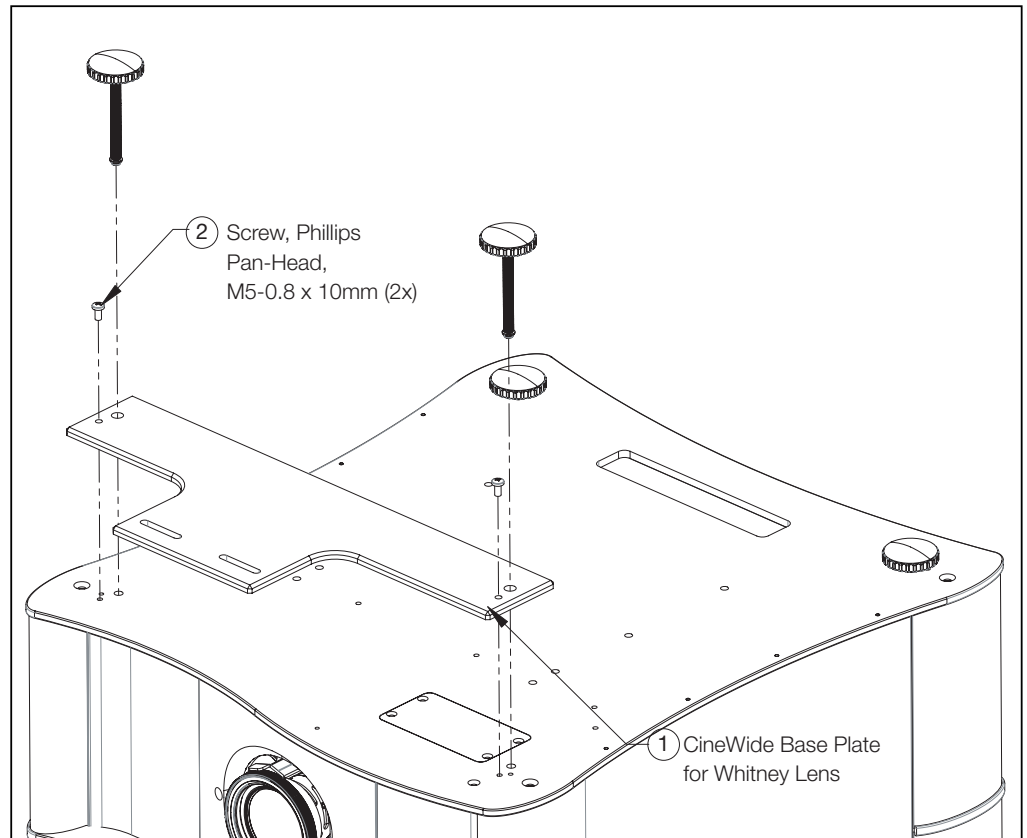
Q-1500d/CineWide with Whitney Anamorphic Lens Base Plate - Exploded View
